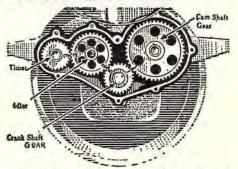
Note the meshing of the crankshaft gear mark (1) between the two teeth on the camshaft gear mark (1). Also observe that in this instance (Overland model 85), there is an idler gear interposed between the crankshaft gear and the gear which drives the ignition timer. This idler gear runs free and is used to obtain a correct ratio and to drive the timer shaft. It must be meshed as shown when the ignition timer is in proper position, as will be explained under "Ignition timing."
